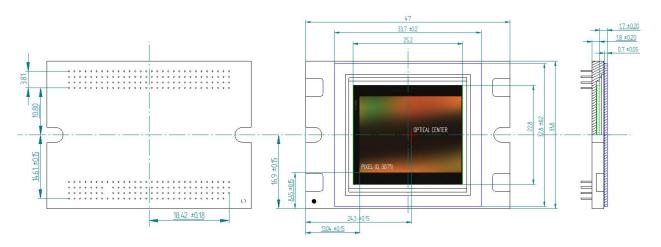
ASSEMBLY DRAWING OF CMV12000 WITH COVER GLASS AND SENSOR DIE, ALL DISTANCES IN MM
